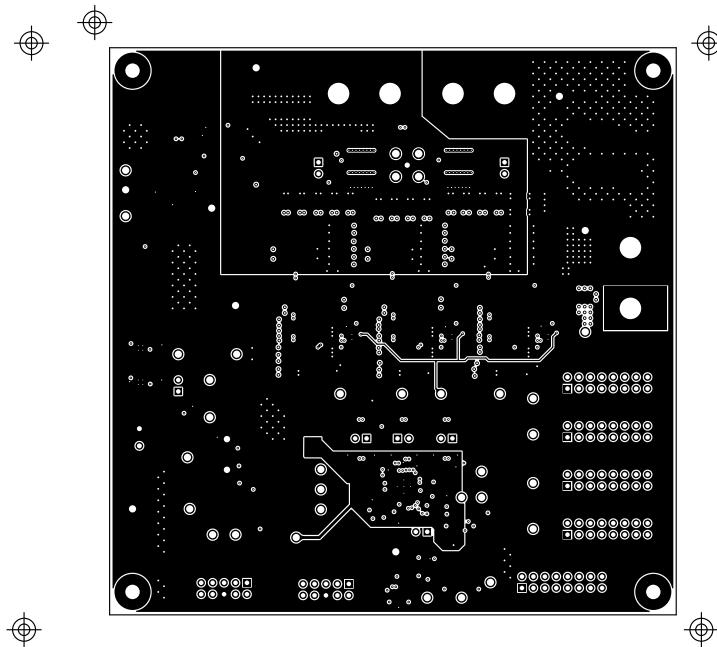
TPS59632Q1EVM-057 PCB Signal Layer 2
